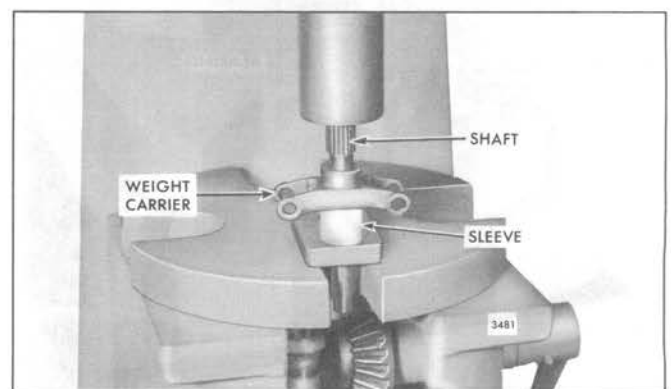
Installing Governor Weight Shaft in Weight Carrier
